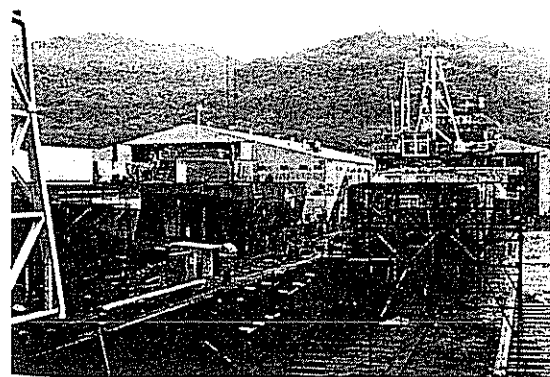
Longitudinal-sloped building ways (courtesy Tacoma Boatbuilding).
